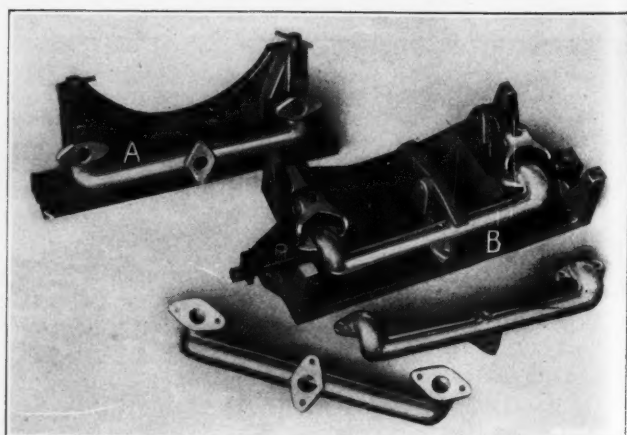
Milling and Drilling Jigs for the Inlet Water Pipes
